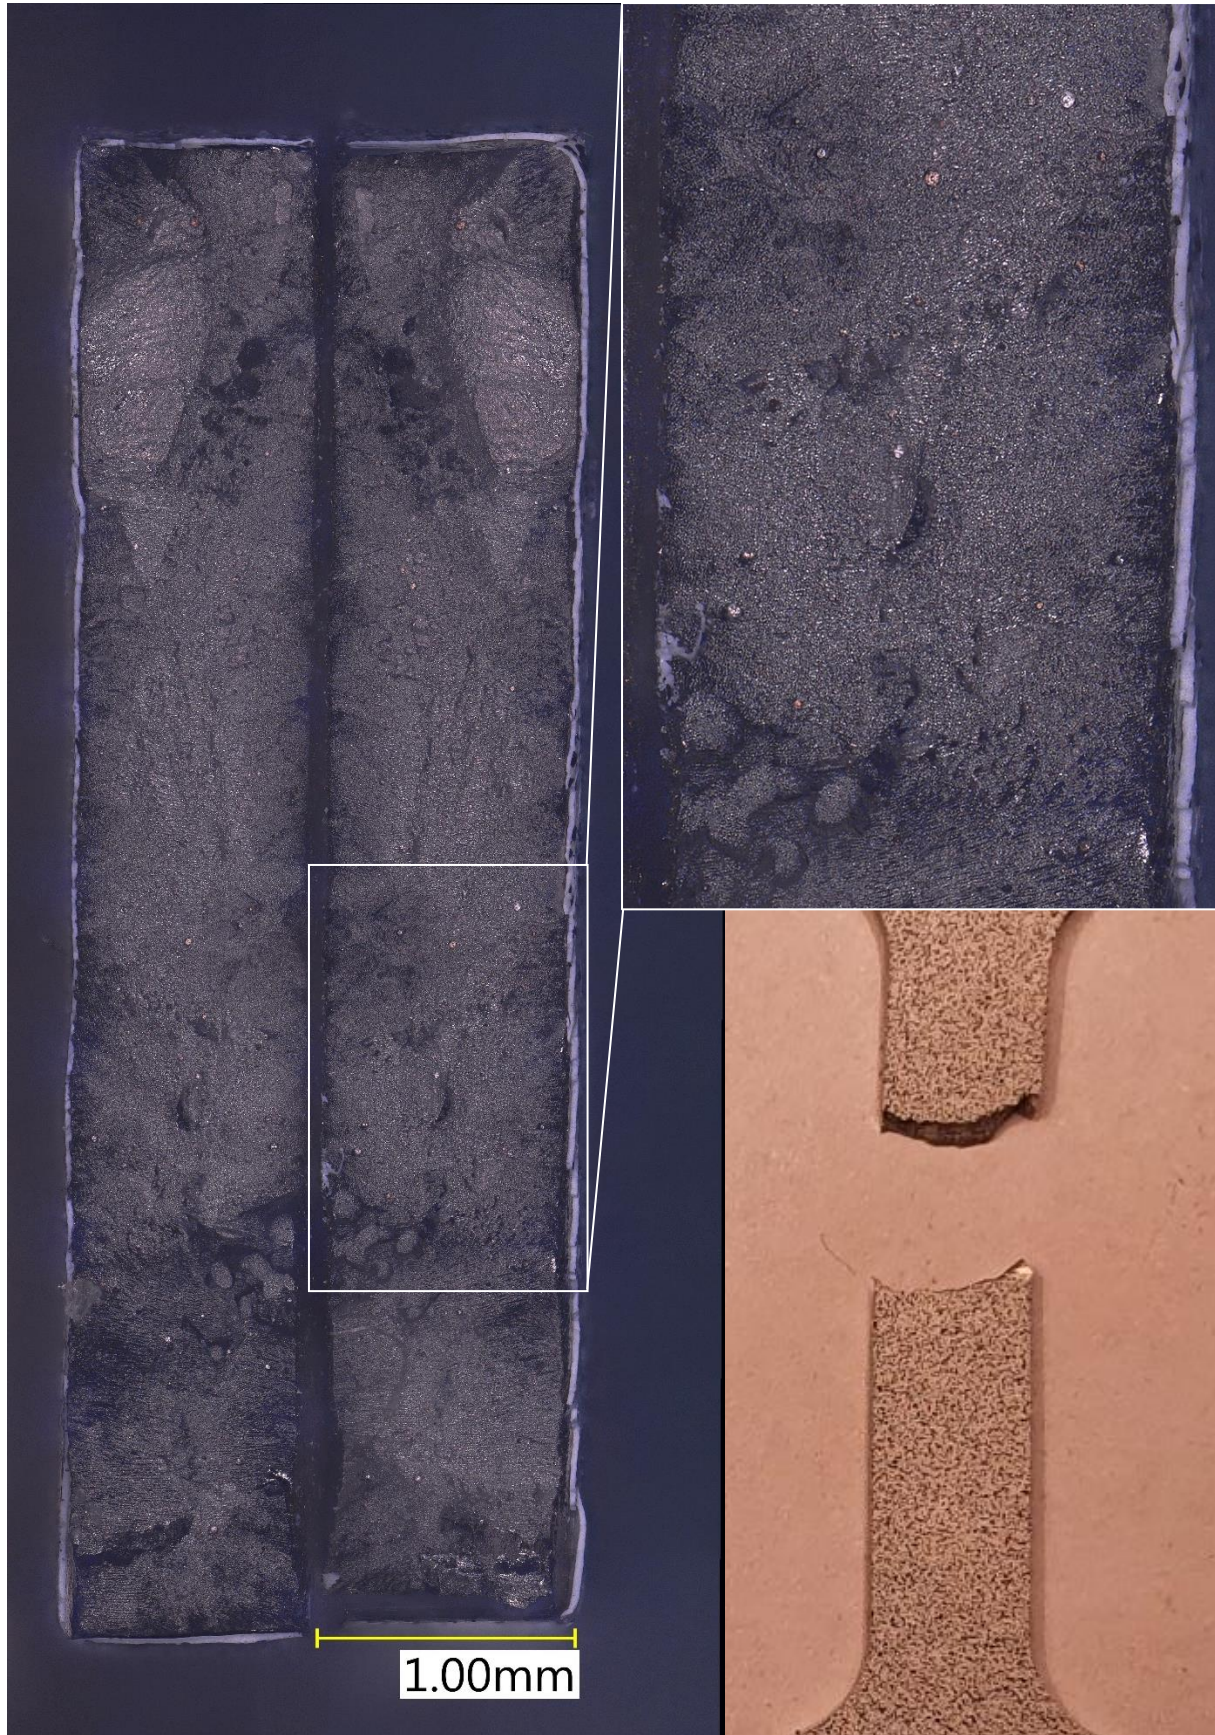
Fracture surface of a C300 LMD Y-direction sample
